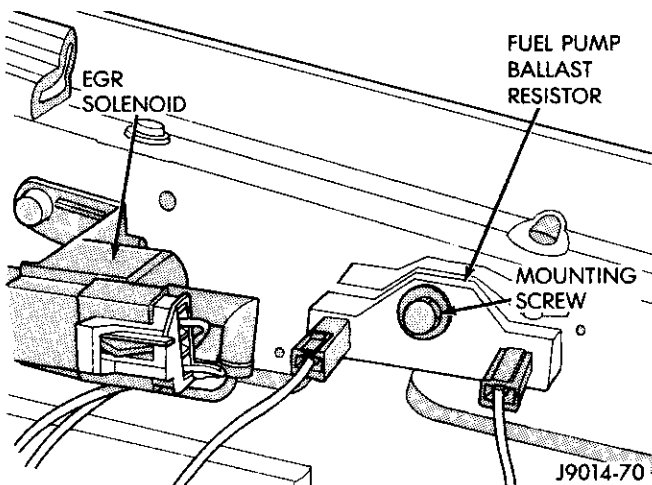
Fuel Pump Ballast Resistor Remove/Install
